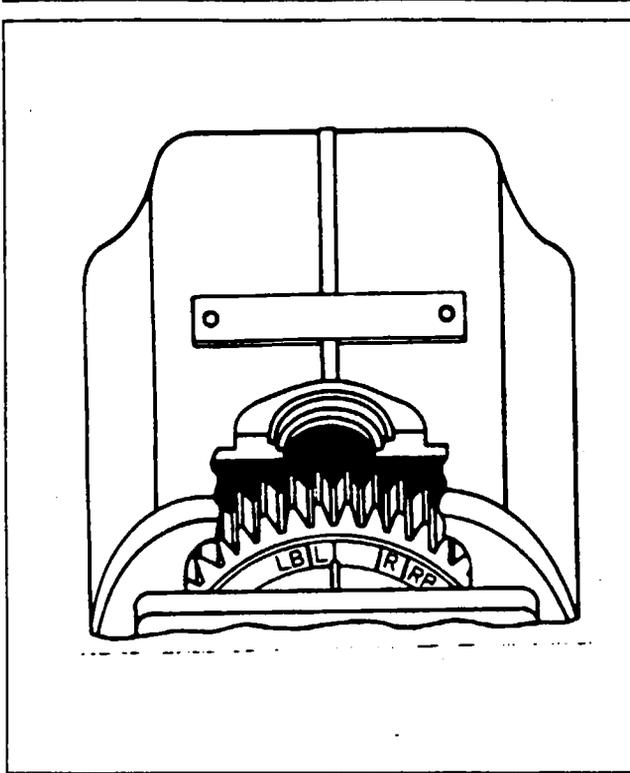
Aligning Timing Marks Single Contact Assembly Magneto
